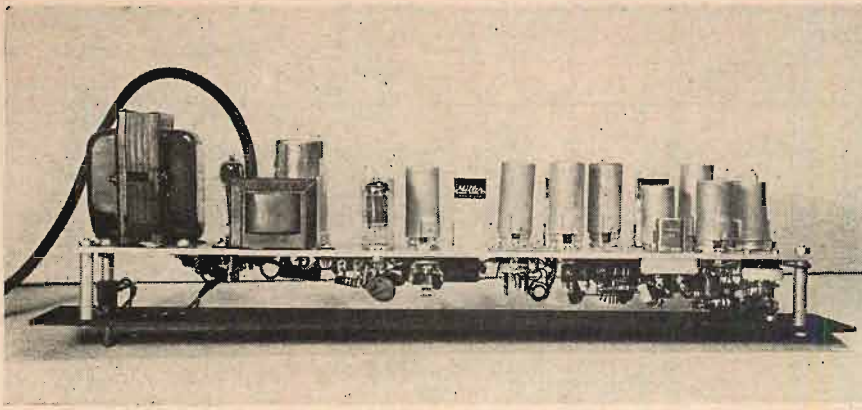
Side view shows how the 1/8-inch aluminum chassis is mounted to the rack panel with spacers.
